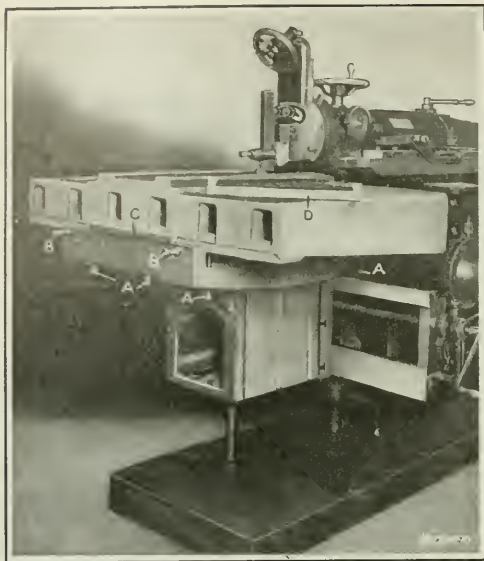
Thirty-two-inch Shaper equipped for planing the Table Bearing on Columns of Multiple-spindle Drilling Machines
